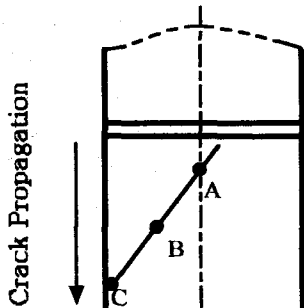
Picture Point of Fracture Surface on Un-peening
